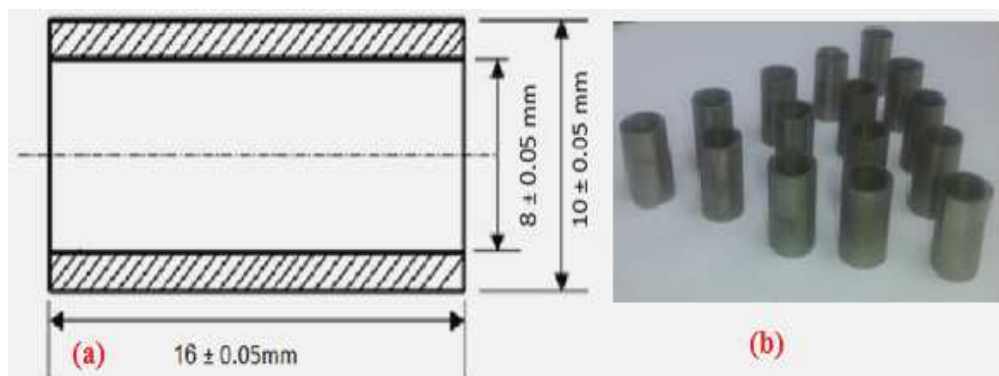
(a),(b) Cast Iron work pieces used in trials and its dimensional details
